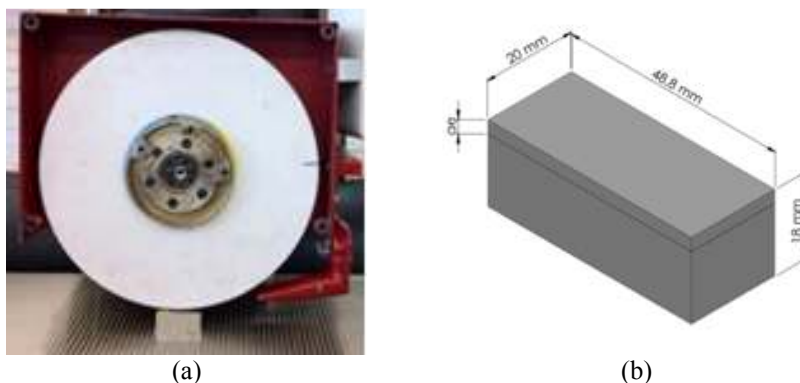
(a) Abrasive wheel – AA46K6V; (b) Dimensions of VP100 steel grade workpiece.
